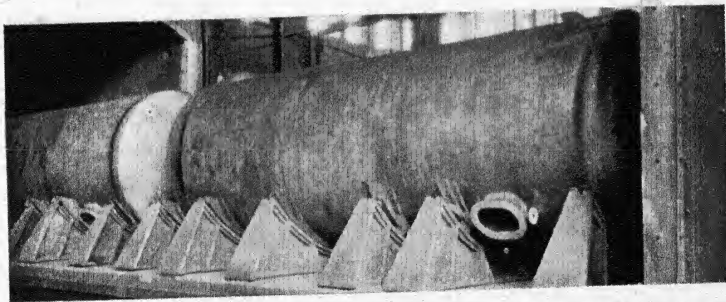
Welded vessels by Blaw Knox being put into annealing furnace.
